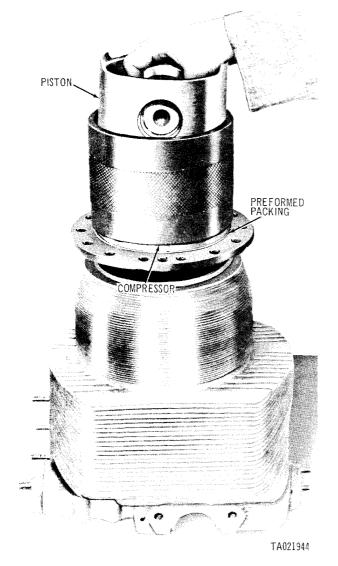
Installing piston in cylinder assembly using compressor and gage.
